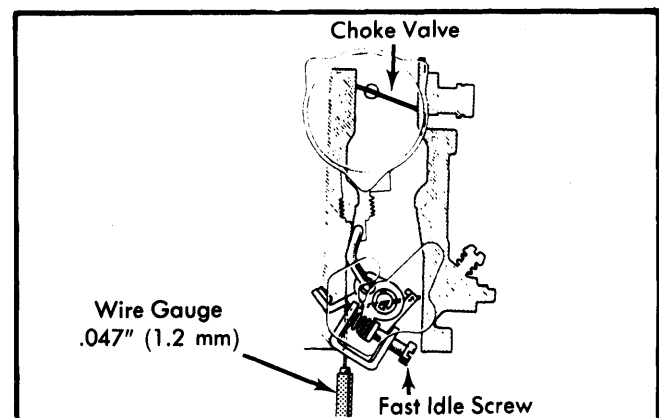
Bench Adjustment of Carburetor Fast Idle
